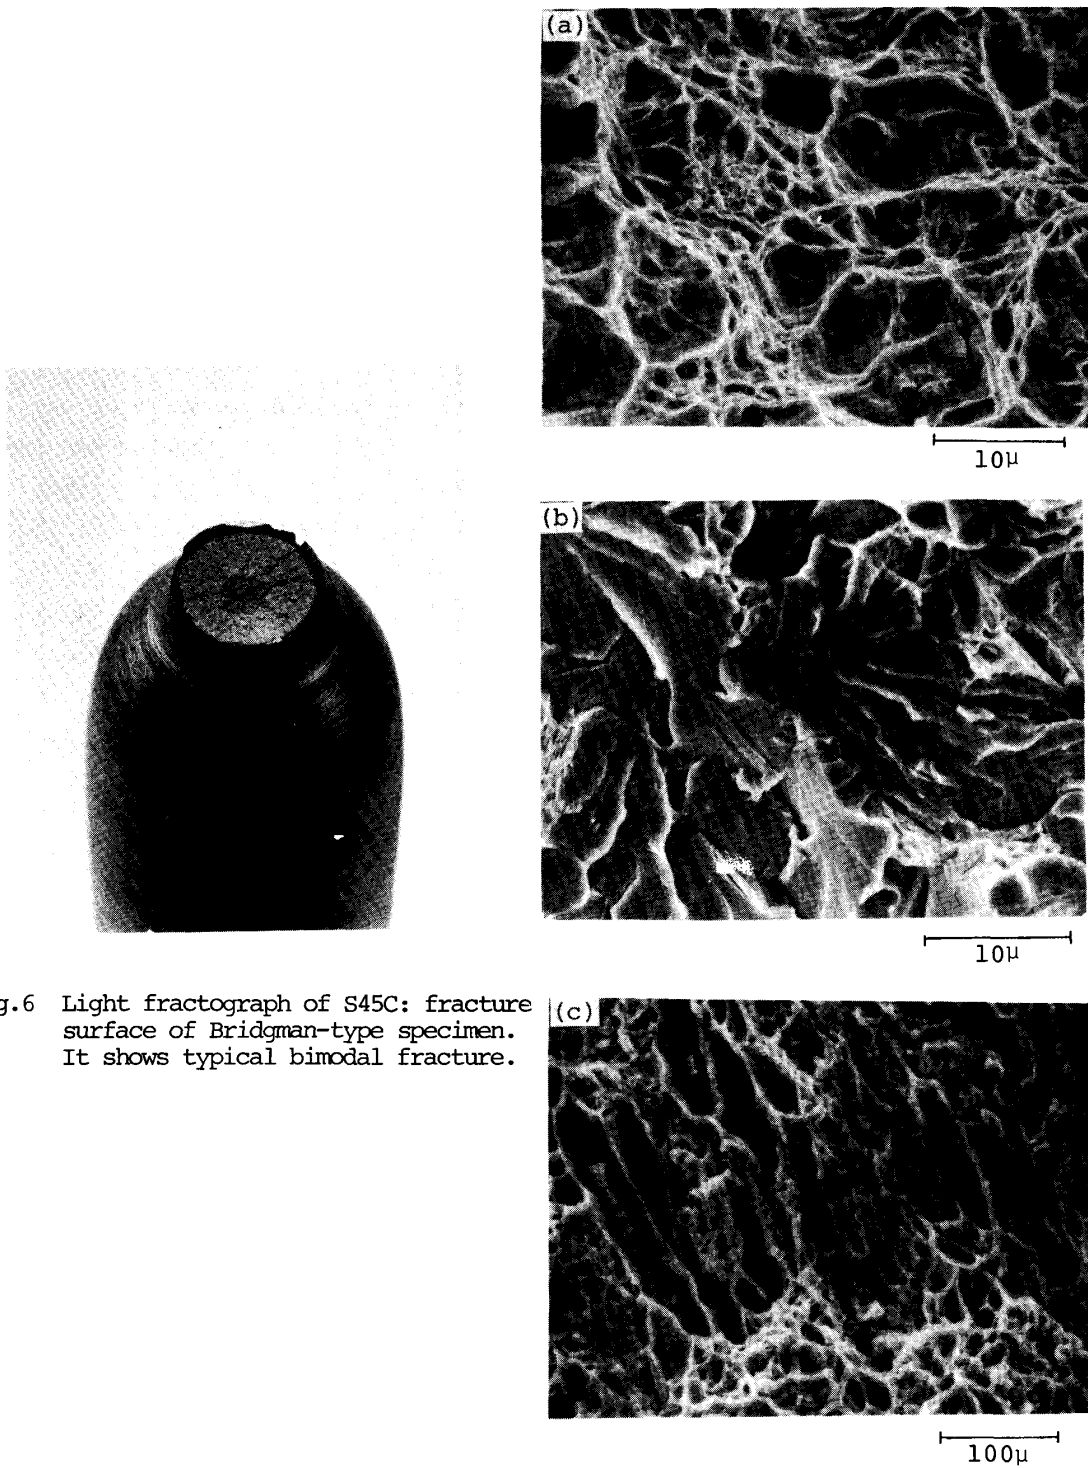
Light fractograph of S45C: fracture surface of Bridgman-type specimen. It shows typical bimodal fracture.
